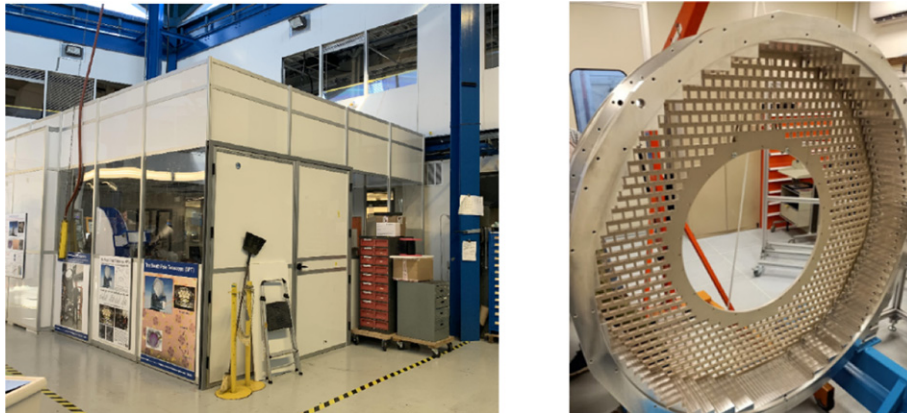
Photograph of the cleanroom for detector assembly at SiDet Laboratory — Fermilab (left). Photograph of the outer ring and back plate assembled at INFN National Laboratory of Frascati (right).
